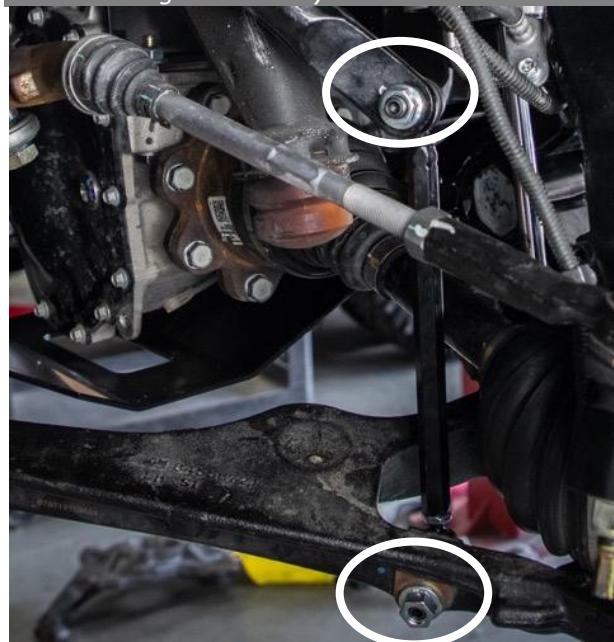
Driver Side Middle Spindle Tab & P-clamps
